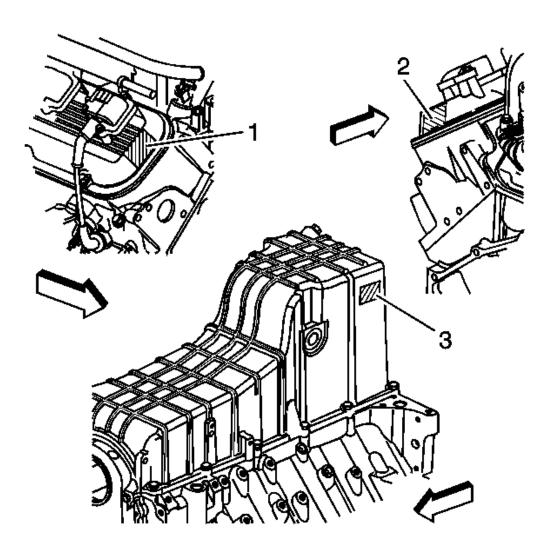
Locating Engine Identification Number Courtesy of GENERAL MOTORS CORP.
